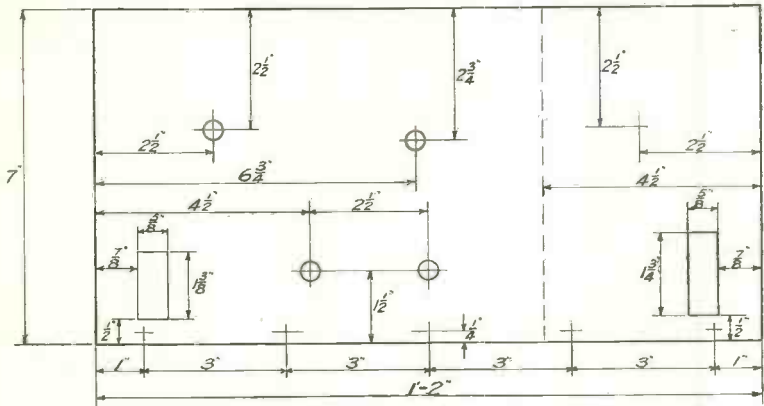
DIMENSIONED DRAWING OF THE PANEL LAY-OUT.
